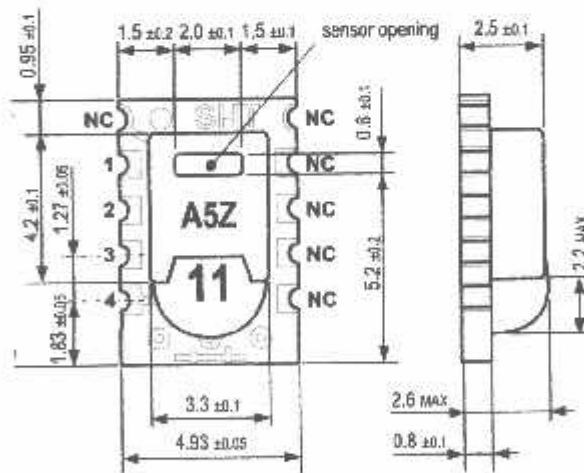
Drawing of SHT1x sensor packaging, dimensions in mm (1mm = 0.039inch). Sensor label gives "11" for SHT11 as example. Contacts are assigned as follows: 1:GND, 2:DATA, 3:CK, 4:VDD.
